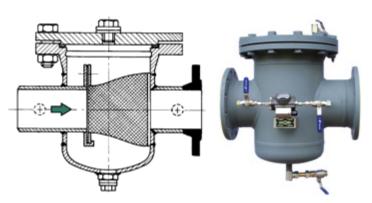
W-Filter type W-SF (welded/flanged end)
